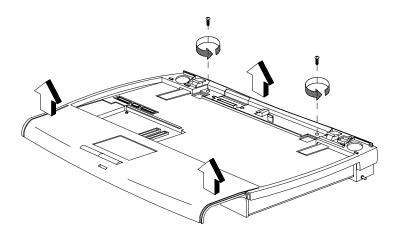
Detaching the Upper Housing from the Inside Frame Assembly
